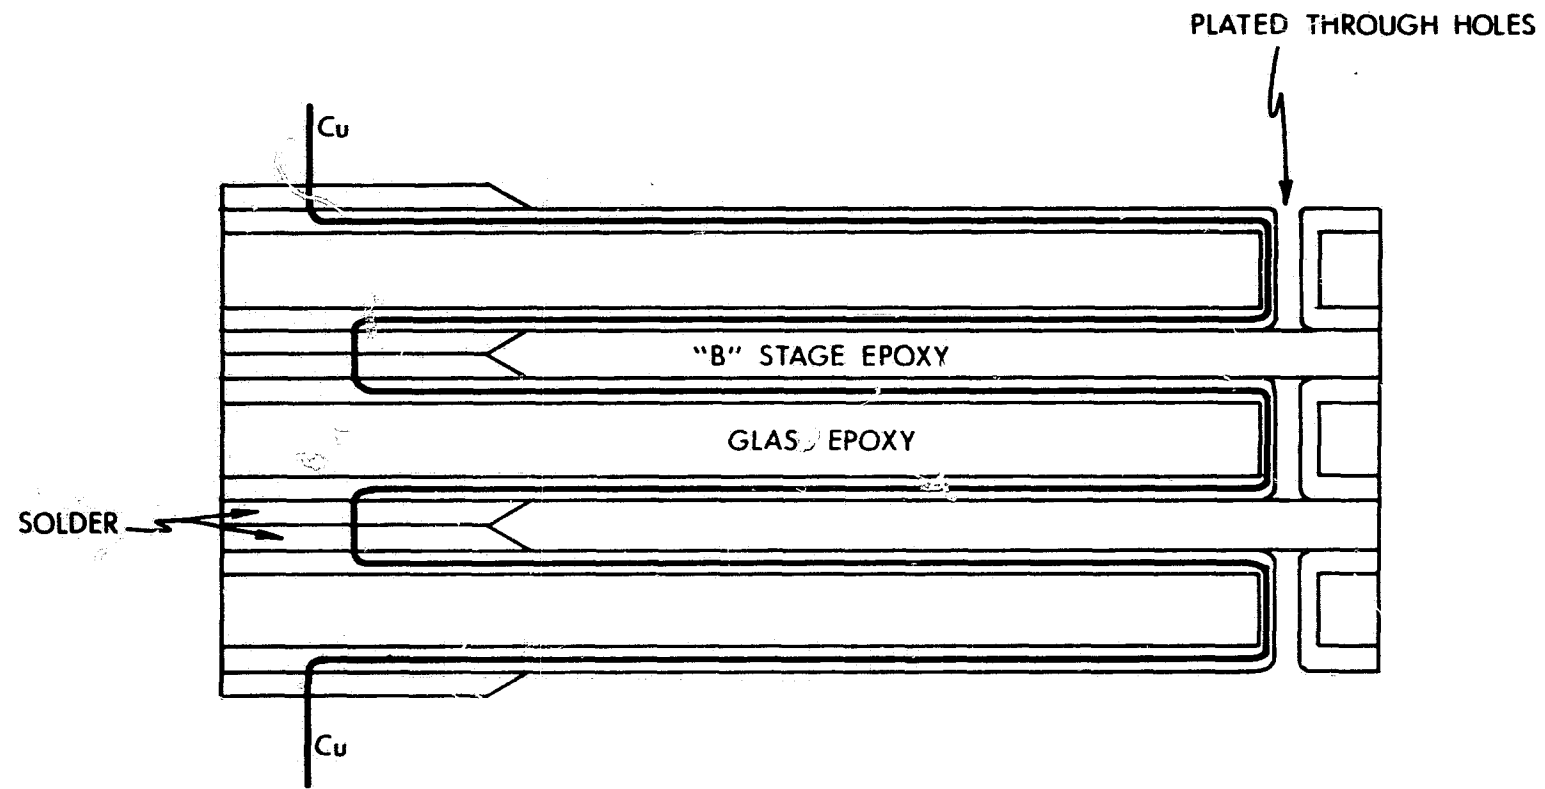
Laminated Word-Line Assembly (Section Through Assembly)
